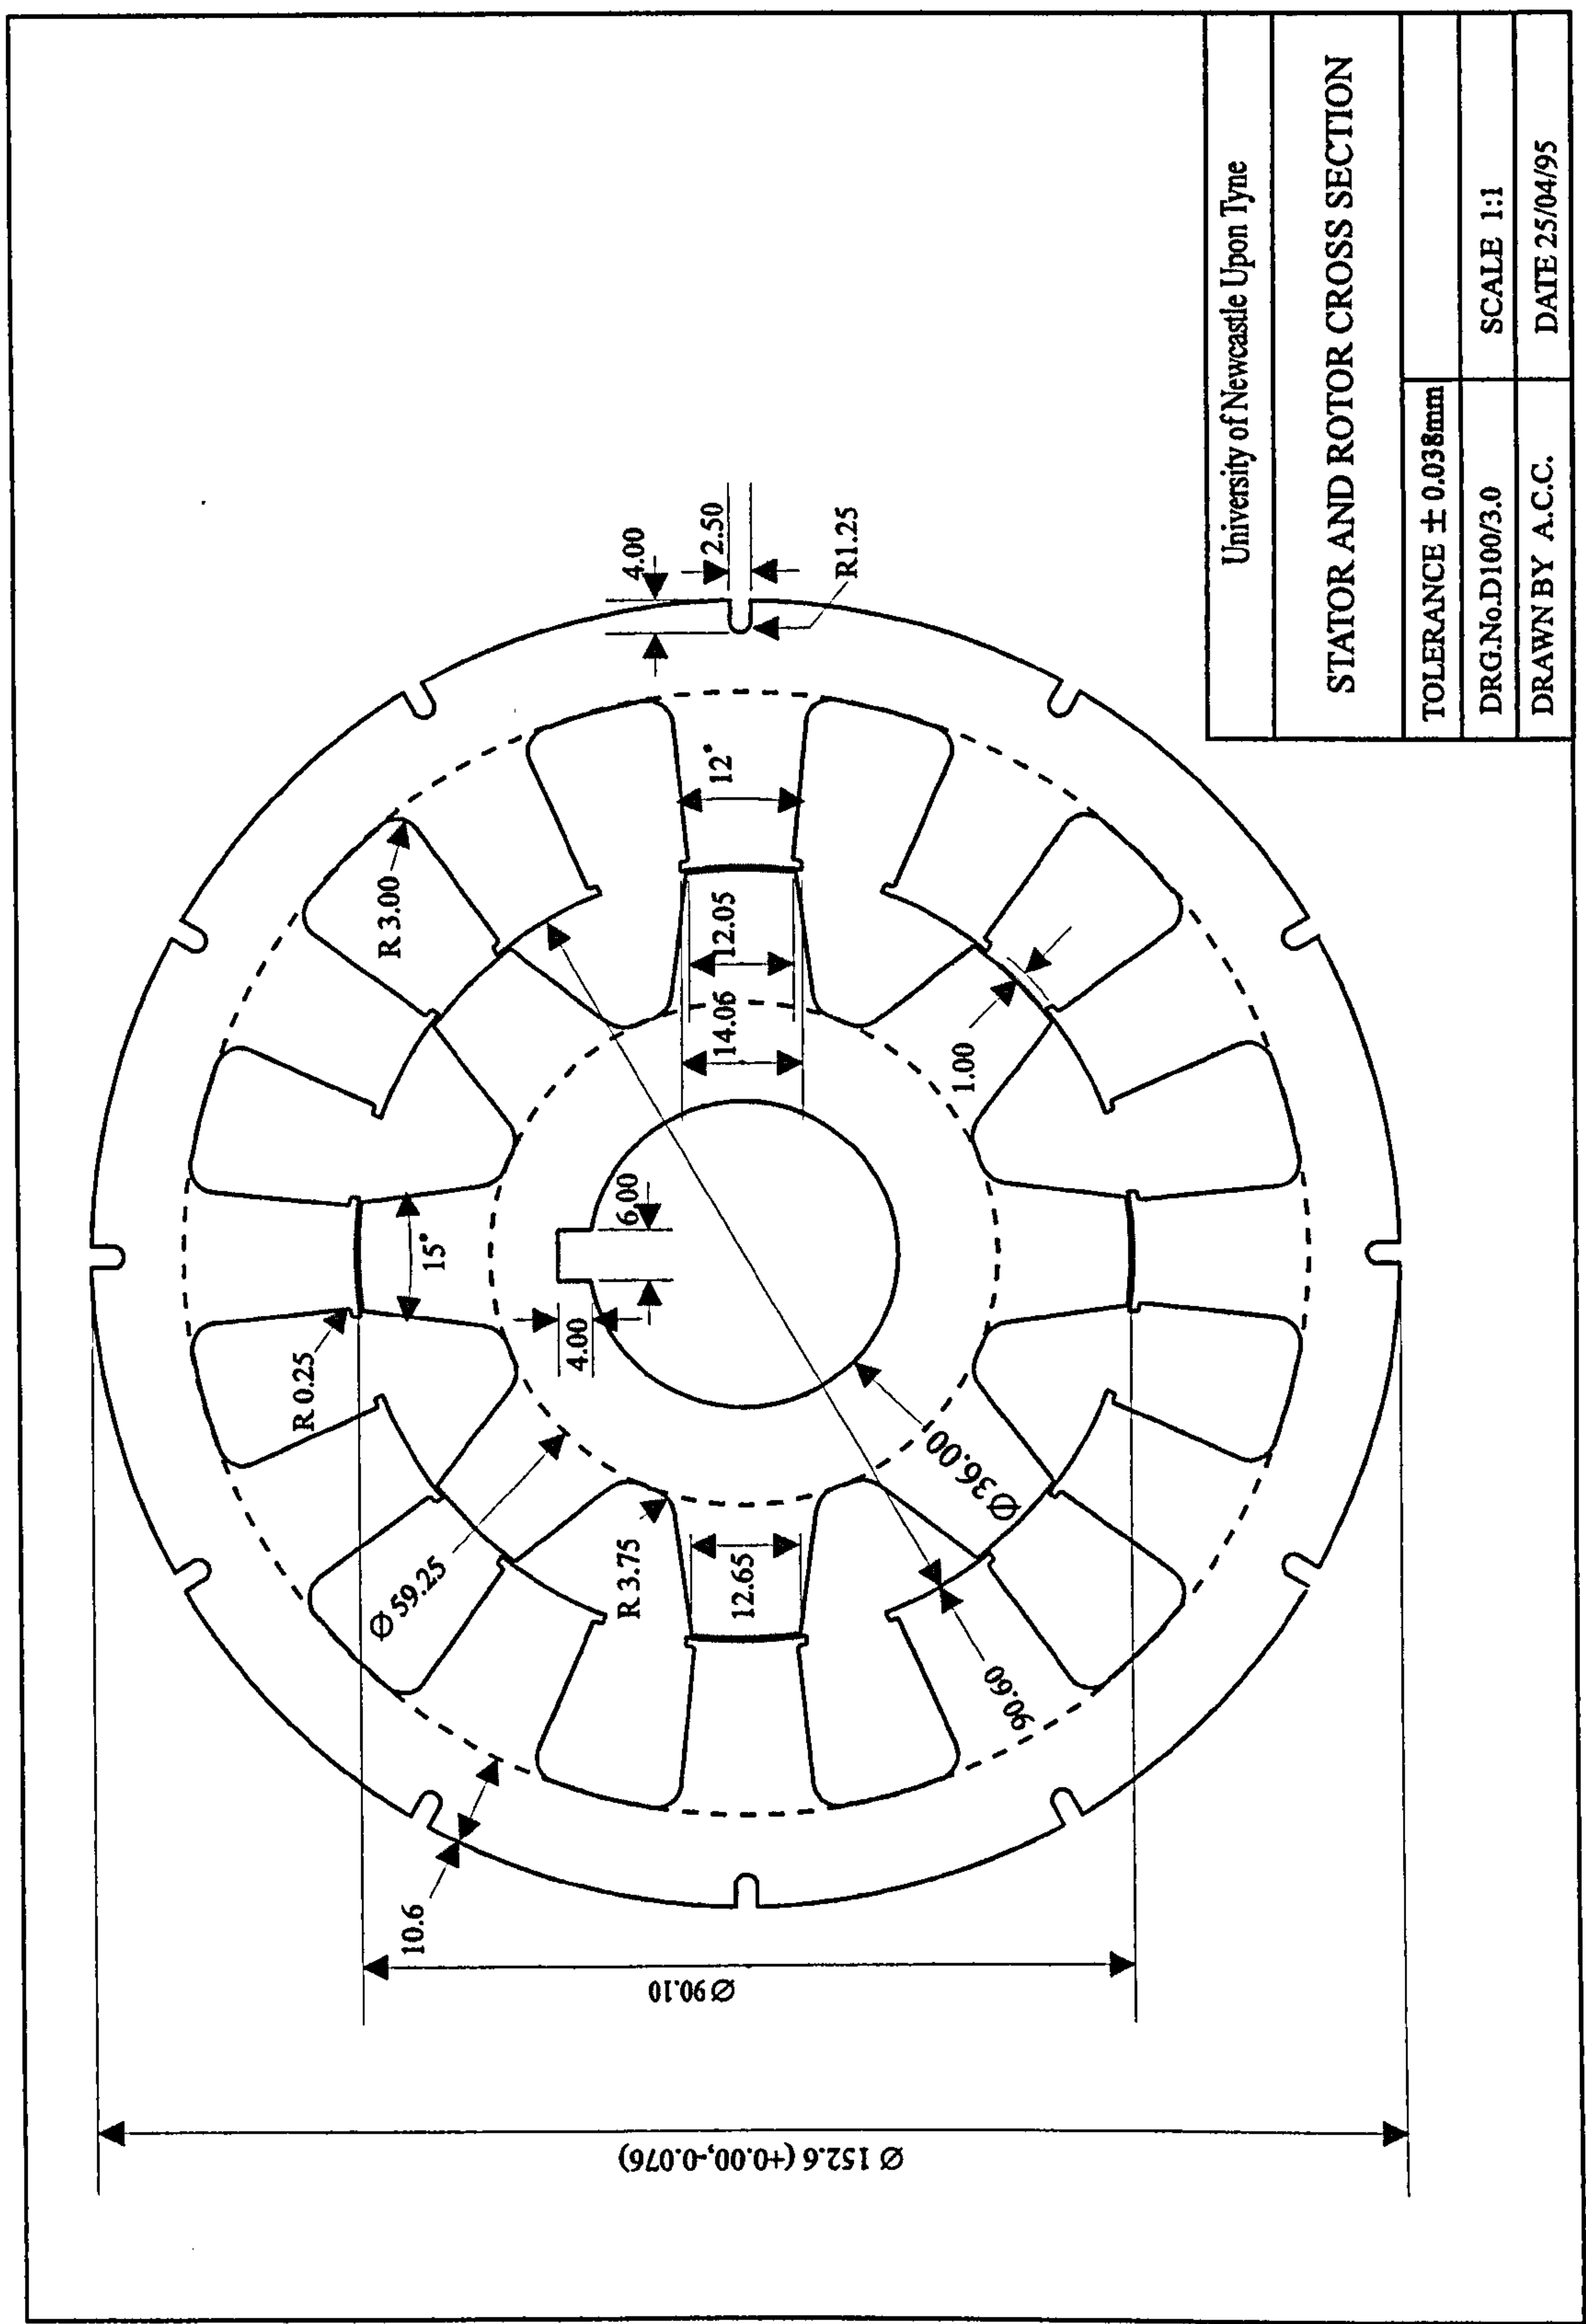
Stator and rotor design for the D100L frame. Dimensions shown in mm.
